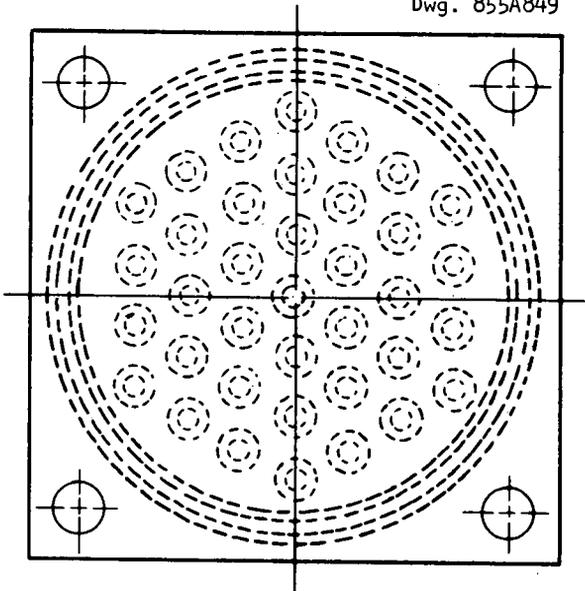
END VIEW OF FUEL CELL TUBE BUNDLE ASSEMBLY
